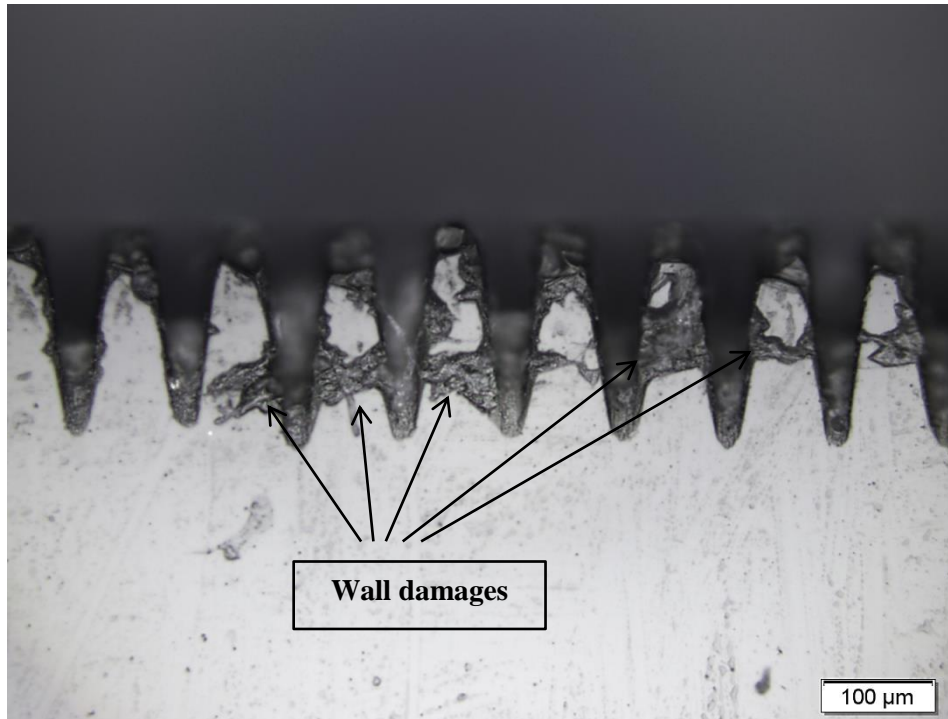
Groove wall damages from side view of Sample 2.
